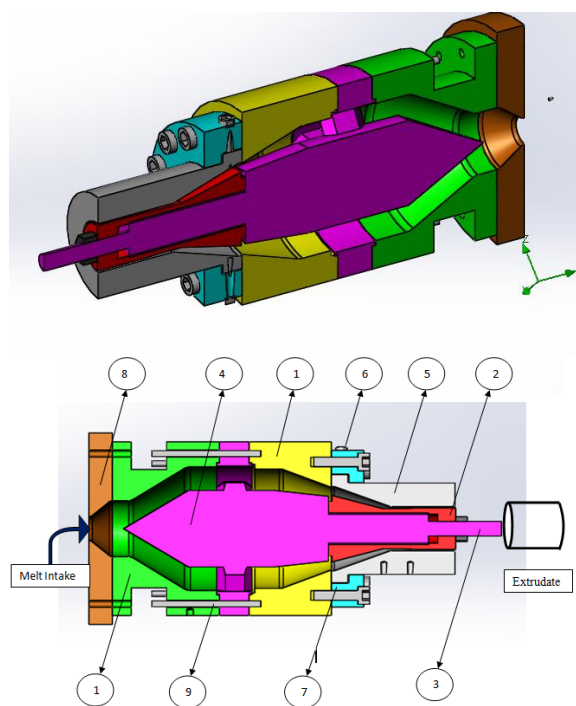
Sectional View of APF Extruder Die Machine Showing Melts Flow Channel, And Melt Intake
